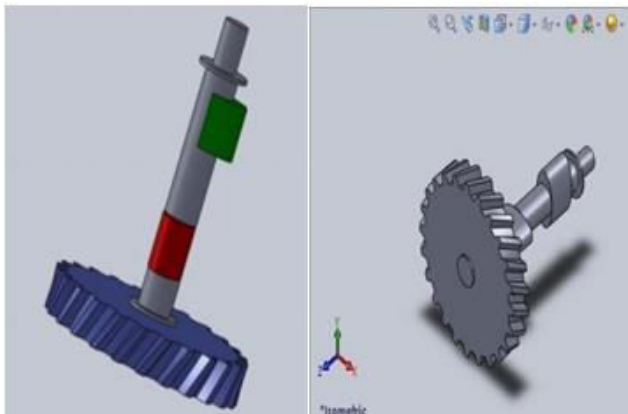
General camshaft with cam lobe and camshaft gear; modified camshaft with cam lobe and camshaft gear.
